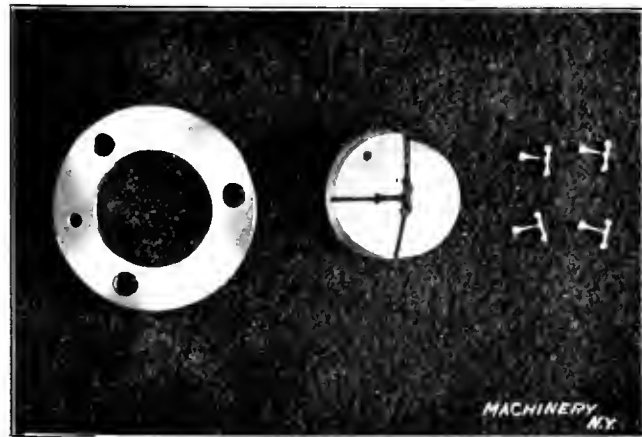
Sectional Dies with Clamping Ring and Samples of the Work
